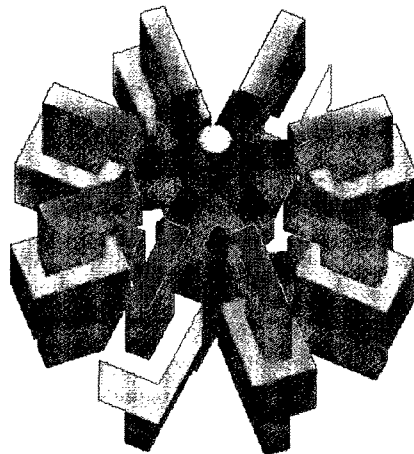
3-D view of dual rotor configuration C-core switched reluctance motor.
